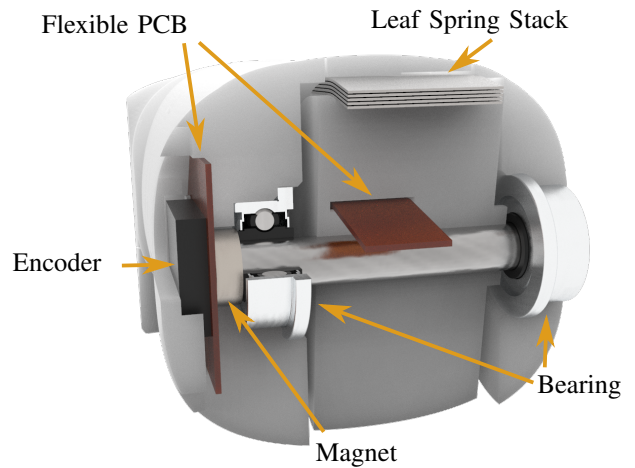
Cross section view through the PIP joint. On the left side a magnetic encoder and corresponding magnet are mounted. At the top a stack of leaf springs provides the necessary torque for finger extension. The PCB runs through the middle of the joint to the fingertip.
